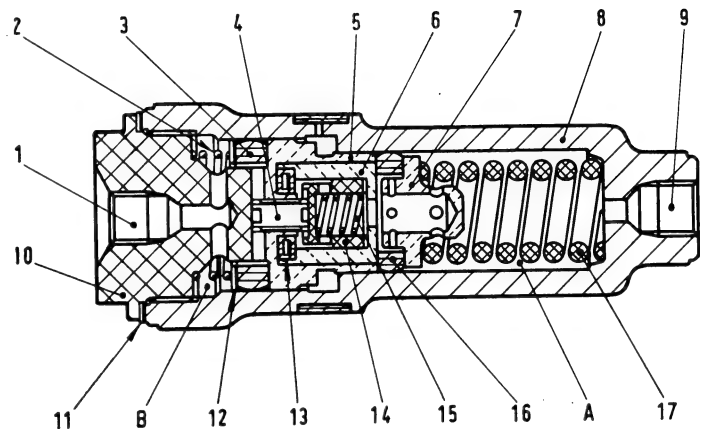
Longitudinal section view of pressure regulating cylinder.
